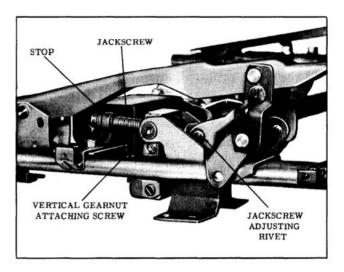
Bucket Seat Adjuster (Outboard)
